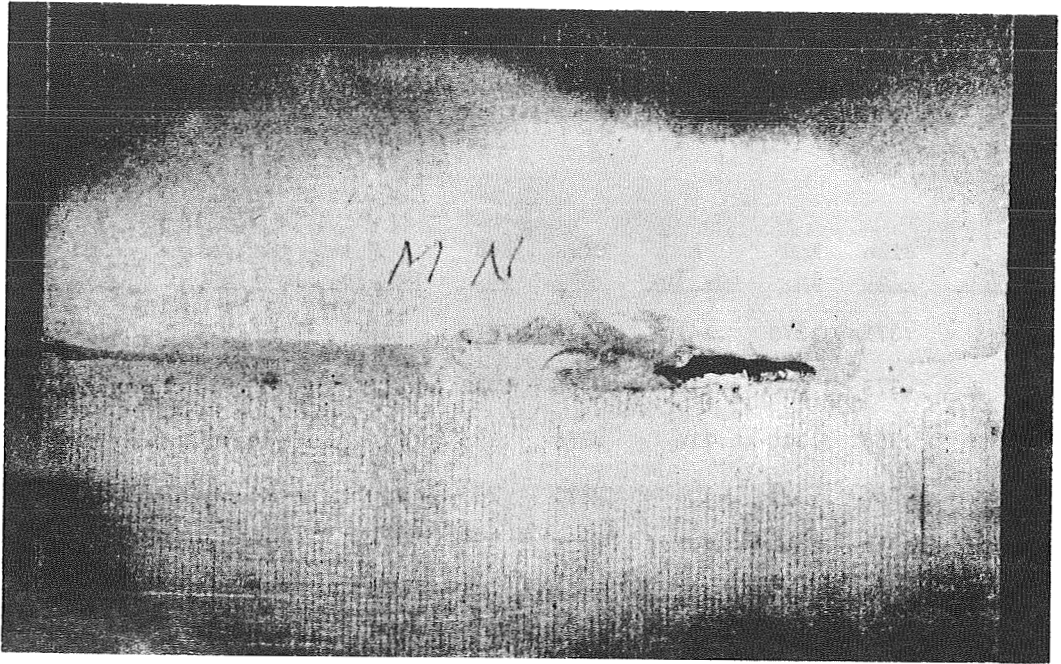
A: Ferromanganese killed TIG welded edges of B3E20L laminations with subsequent Electron Beam weld to AISI 4620 block.
